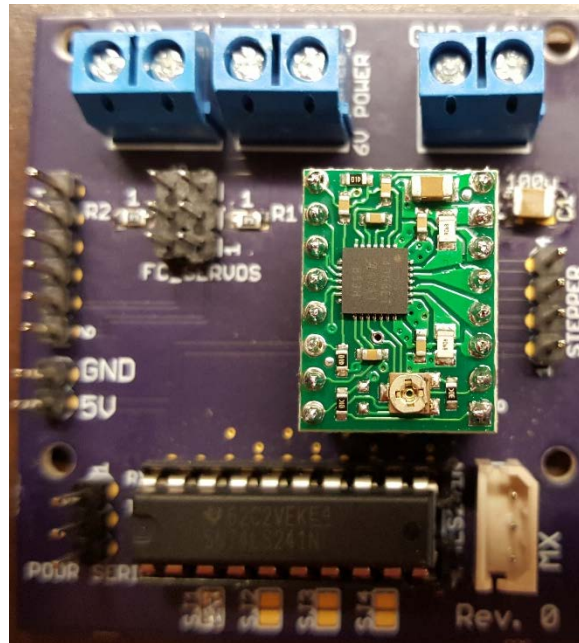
A4988 STEPPER MOTOR DRIVER (GREEN PCB), INSTALLED INTO AUXILIARY BOARD.
